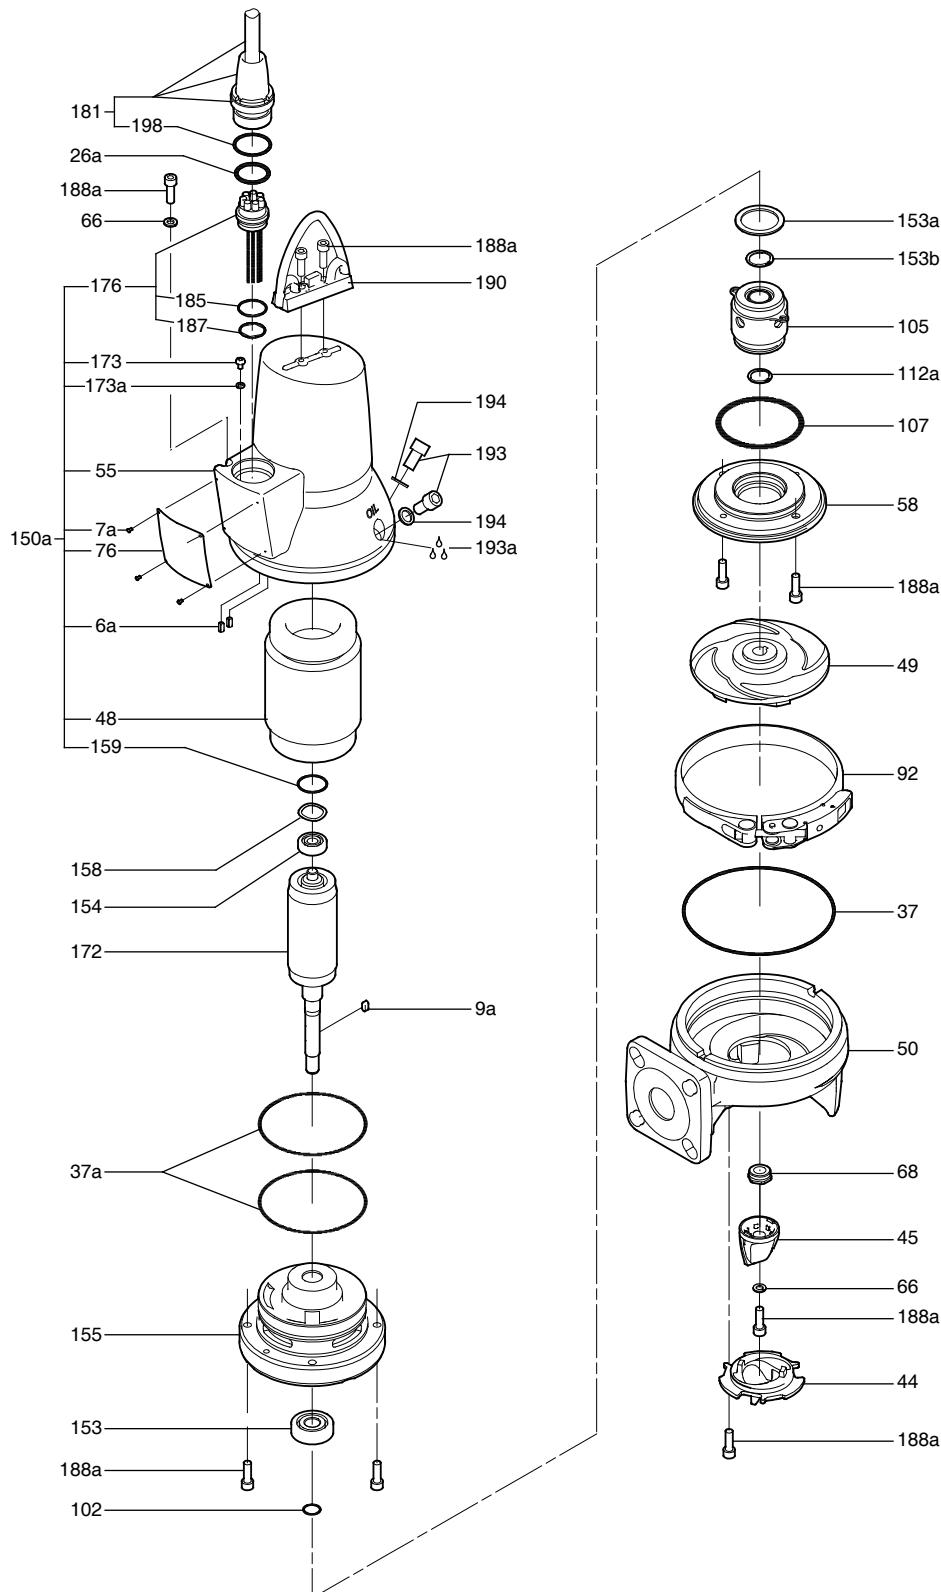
Sectional drawing of SEG pumps, 2.6, 3.1 and 4.0 kW
